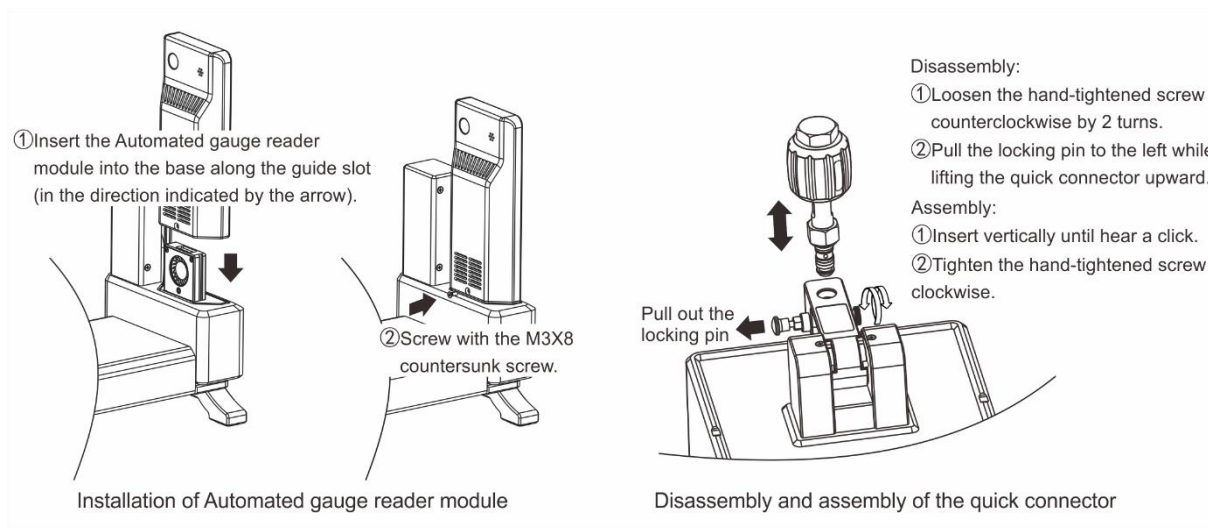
Automated gauge reader module & quick connector disassembly and assembly diagram
